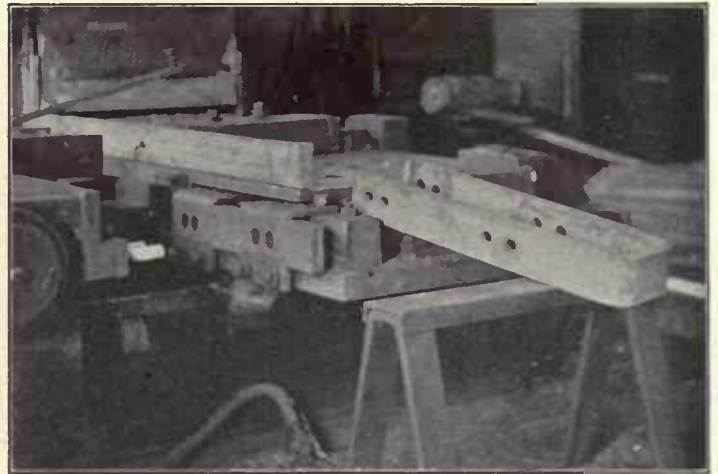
Bending and Punching Miner Draft Rigging Yokes.
